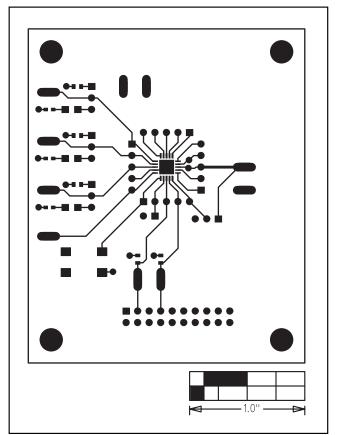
MAX6884 EV Kit PC Board Layout—Component Side
